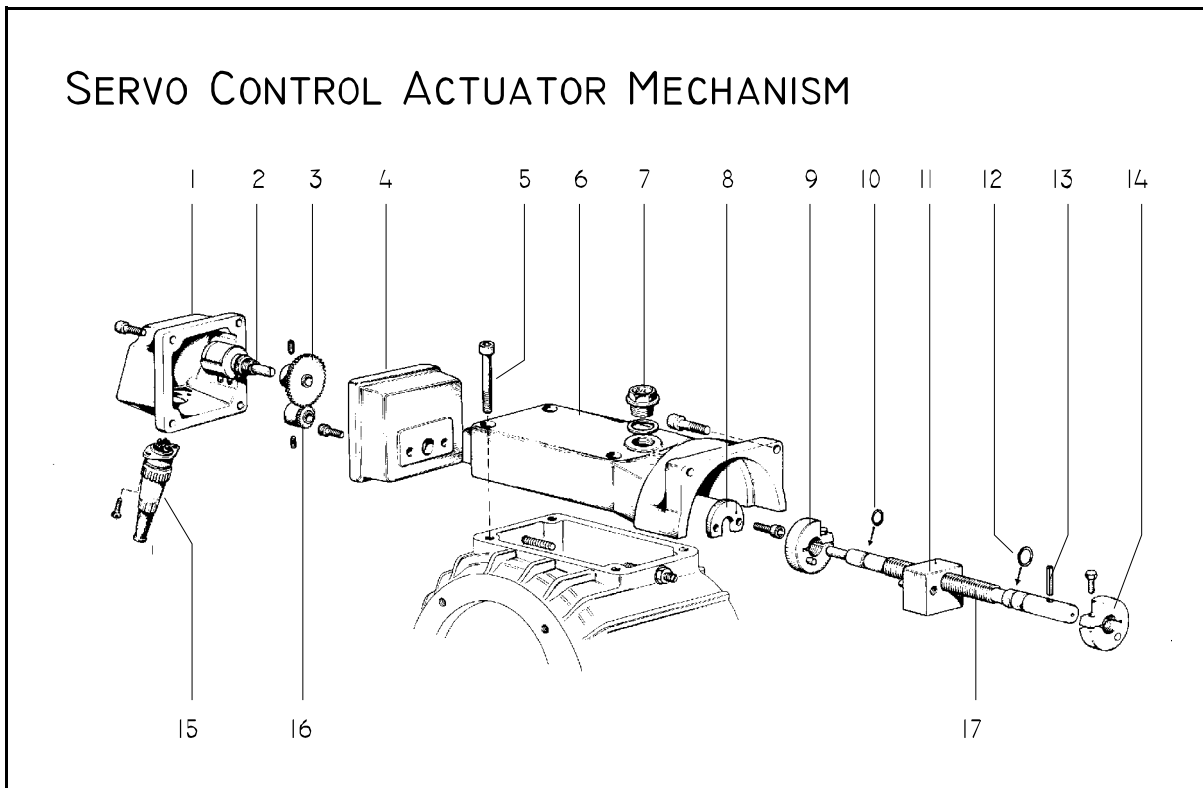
Discharge Variator Servo Motor (Exploded View)
